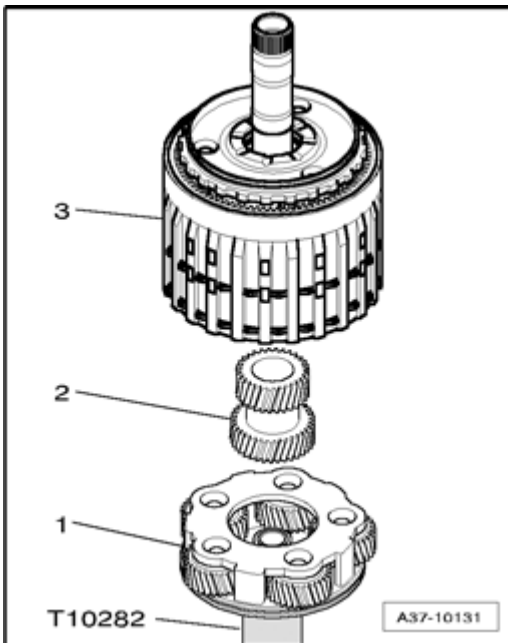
Planetary Carrier "I", Planetary Drive "I" + "II" And Sun Gear
